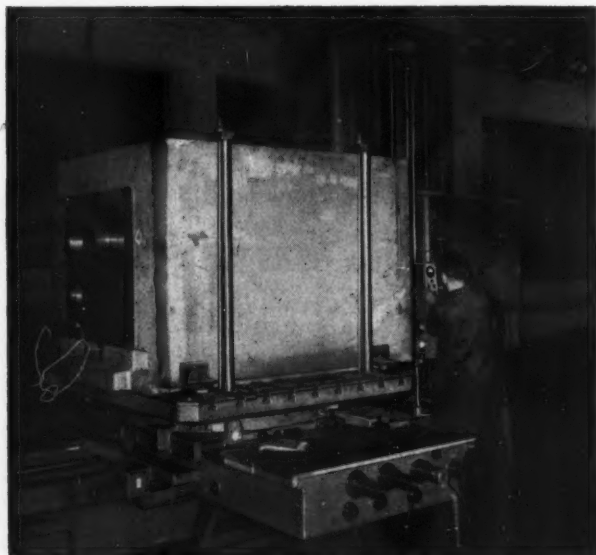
Machining the headstock casting for a type TP100 lathe, the largest in the current IMOR range, on an East-German Union type BFT 125/1 horizontal borer
